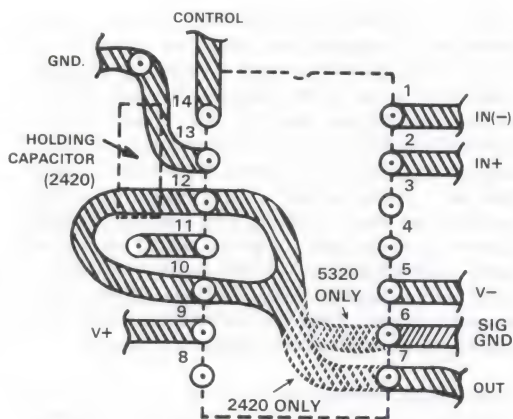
GUARD RING LAYOUT (BOTTOM VIEW)
